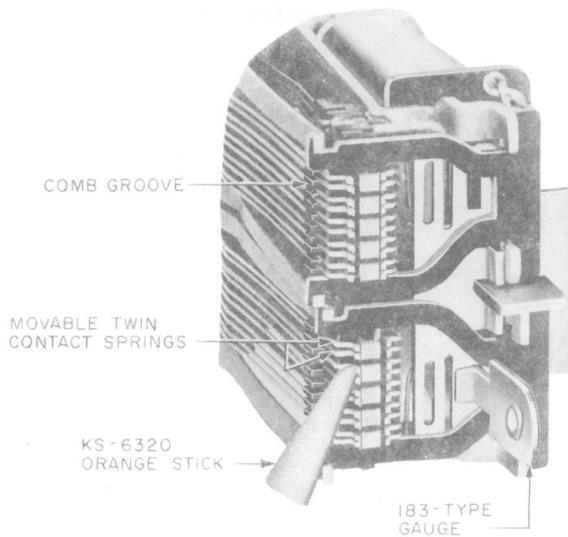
Method of Checking Open or Cloed Contacts of AM-Type Relay
